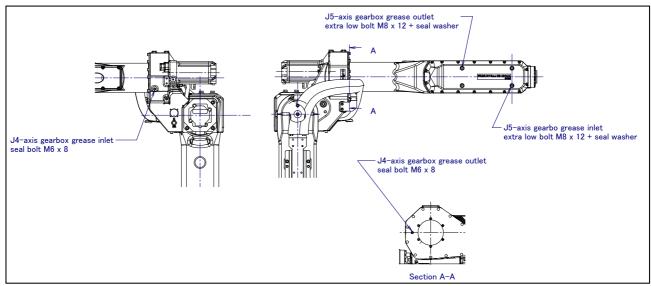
(a) Greasing point of J4/J5-axis gearbox (M-20*i*A/20M/35M)
